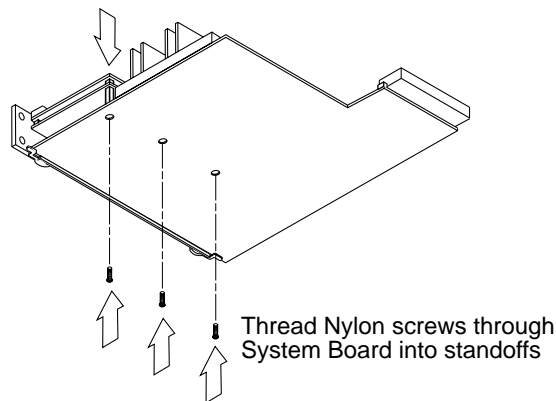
Attach the ZX Board Standoffs to the System Board
